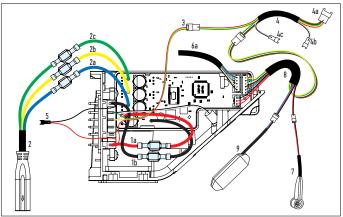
Control unit cabling for the torque revolution sensor with gear sensor
